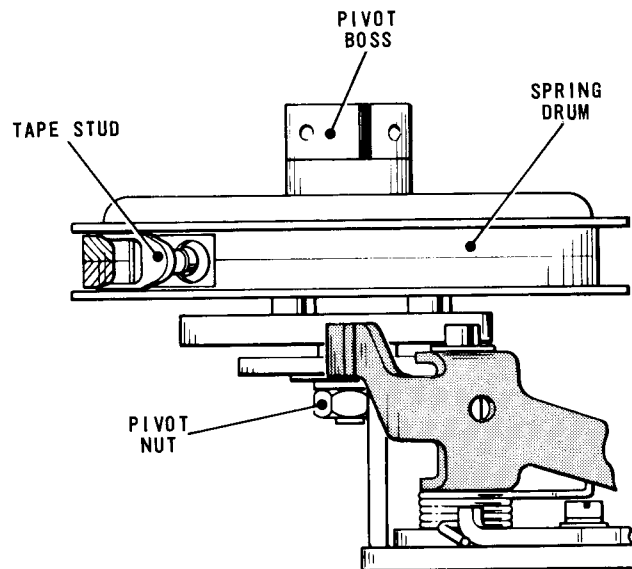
CARRIAGE RETURN SPRING DRUM
